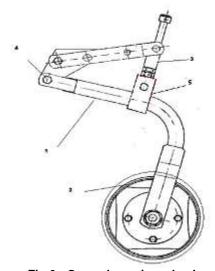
Ground copying wheel 1-frame. 2-wheel with tire. 3-nut screw mechanism. 4 frame mounting system. 5-wheel changing wheel
